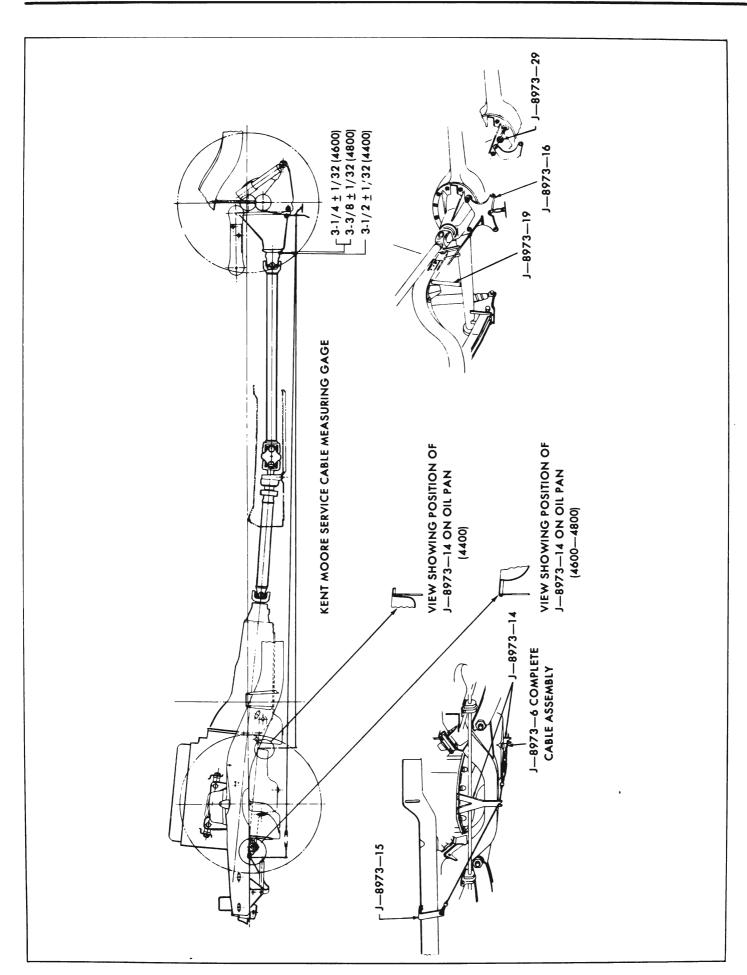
Checking Rear Universal Joint Angle—4400-4600-4800 Series
